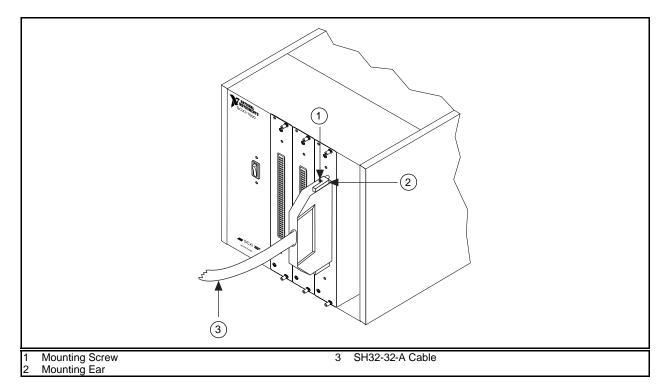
Connecting the SH32-32-A Cable to the SCXI Module
